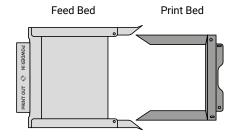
The proper arrangement of the IO BOX, allowing the user to remove the finished printout.
